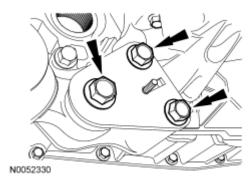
Locating Roll Restrictor-To-Transaxle Bracket Plate Bolts Courtesy of FORD MOTOR CO.
